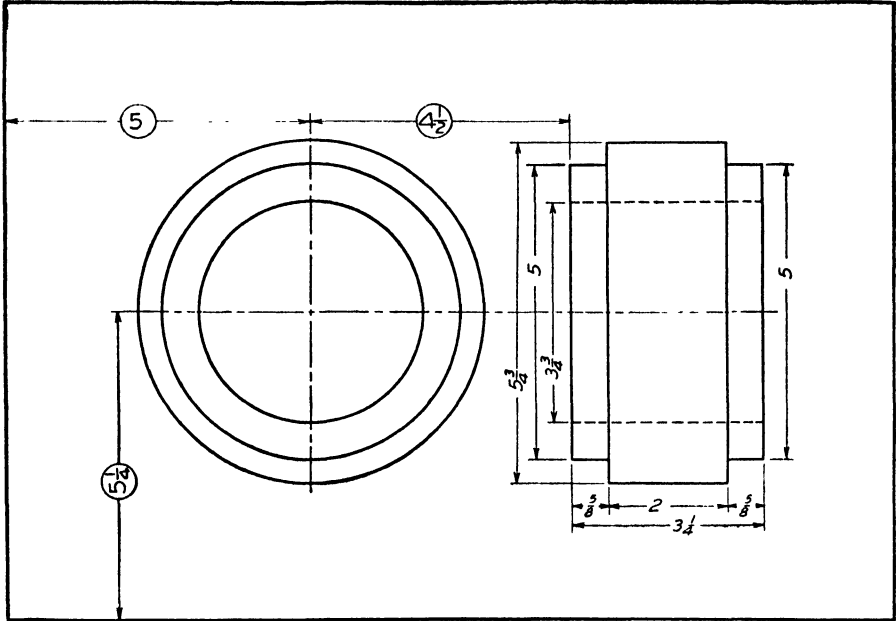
Prob. 139. Make a two-view drawing of the cylindrical spacer, the right-hand view to be a full section.
